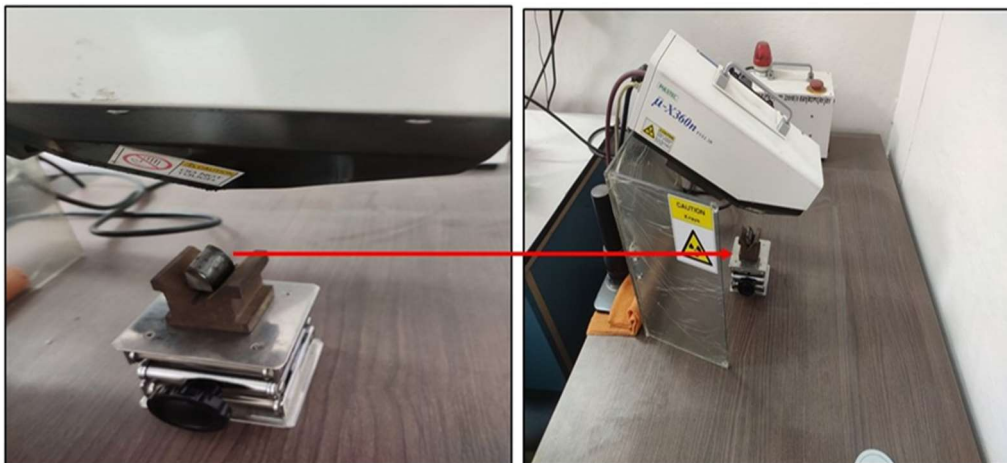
Specimen of a L-0 low pressure steam turbine blade mounted on the μ -X360 machine
